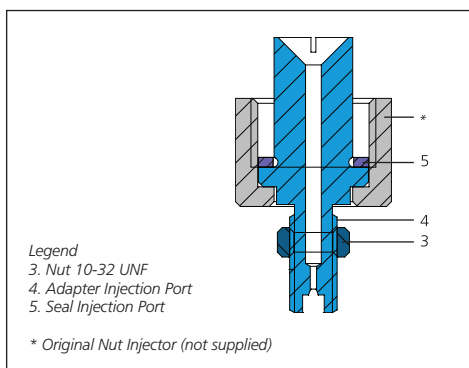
Image of the injector showing the SilTite™ FingerTite injector adapter assembly.
